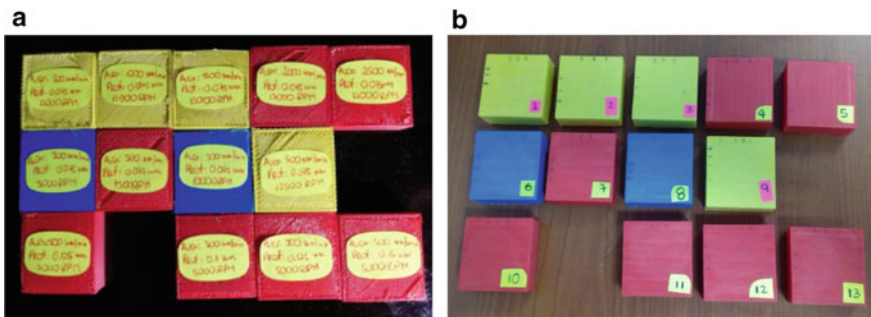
FDM produced workpieces. a Before milling b After milling
